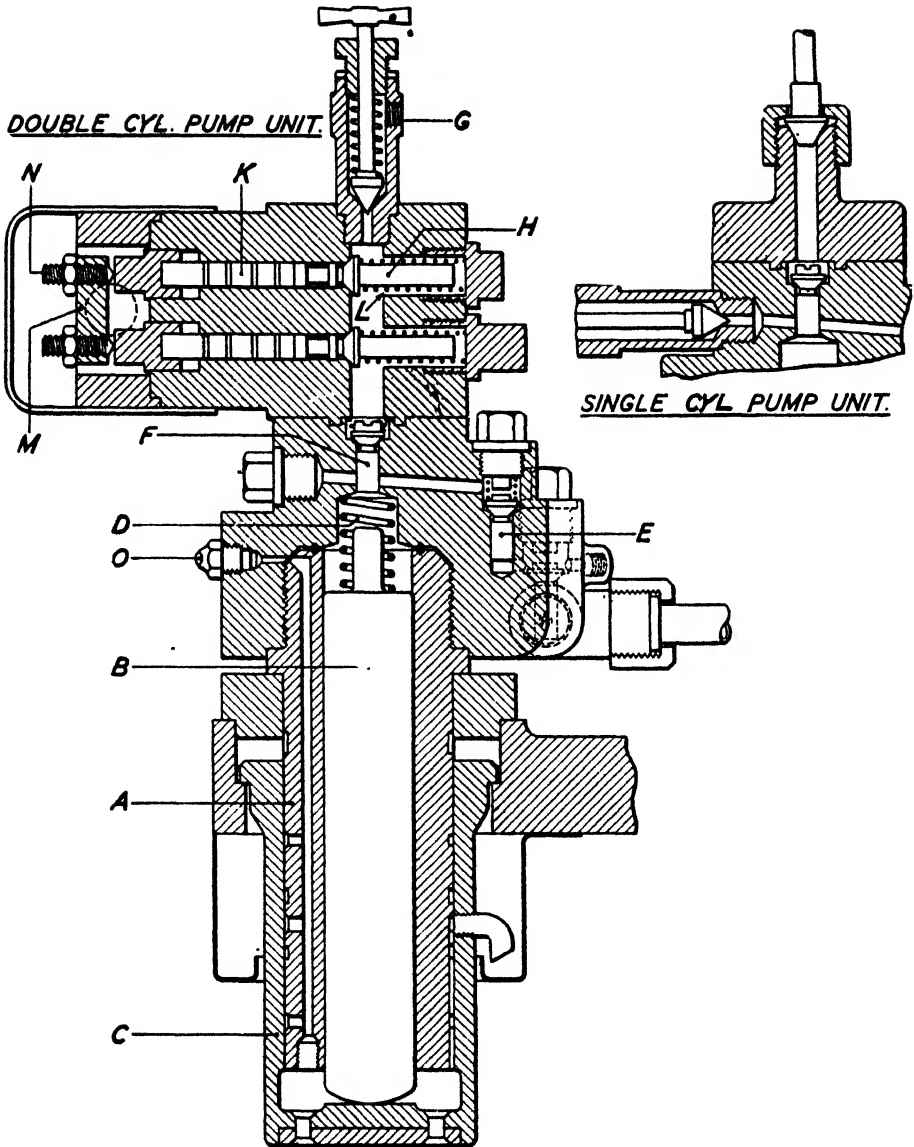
A SECTIONAL VIEW OF THE ROBEY FUEL PUMP, SHOWING BOTH SINGLE- AND DOUBLE-CYLINDER PUMP UNITS
